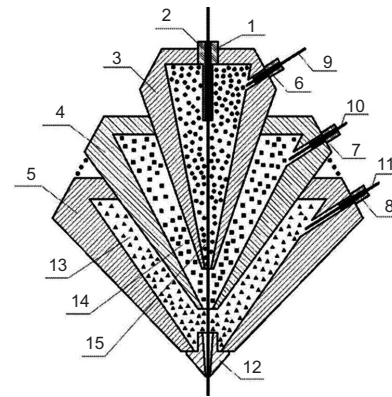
Design layout 1 for a multi-stage wire feeding print head [90].
